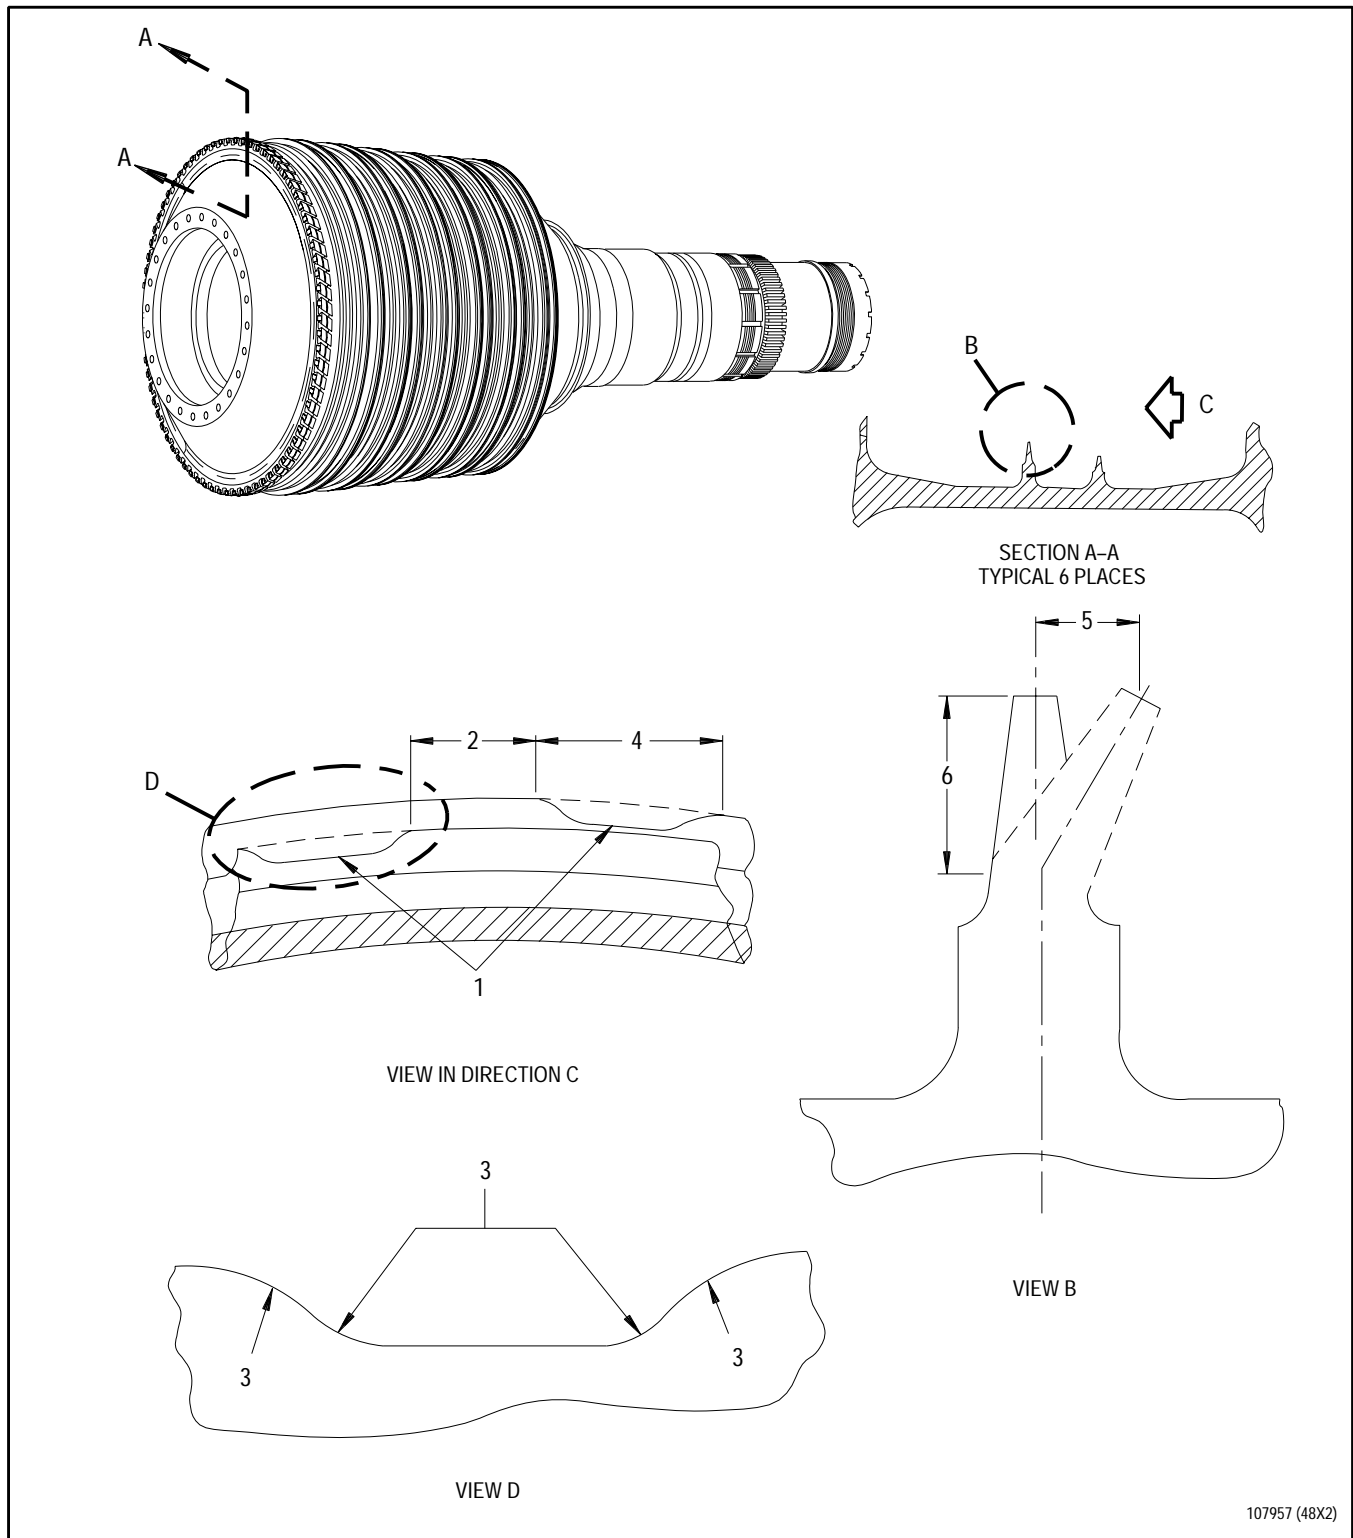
Disk-Drum Rotor, Rear Compressor, Rear, Assembly - Knife-Edge Blending
